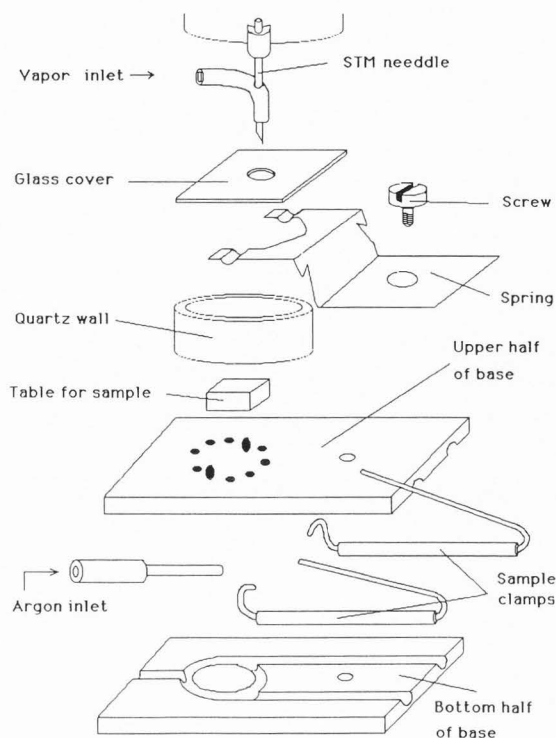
An exploded view of a flow-through chamber for taking STM images under inert atmosphere.
